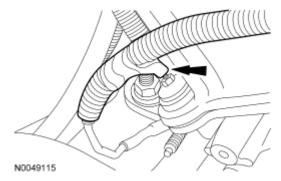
Generator Battery Cable Retainer Courtesy of FORD MOTOR CO.
